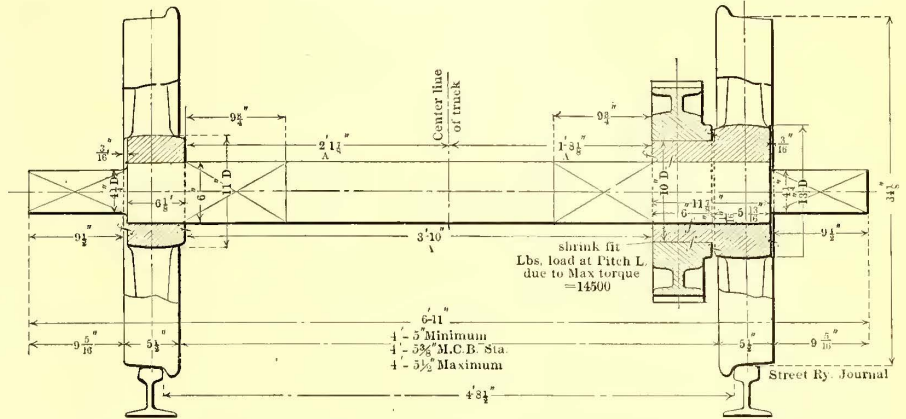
MOTOR AXLE, WHEELS AND GEAR—METROPOLITAN RAILWAY
